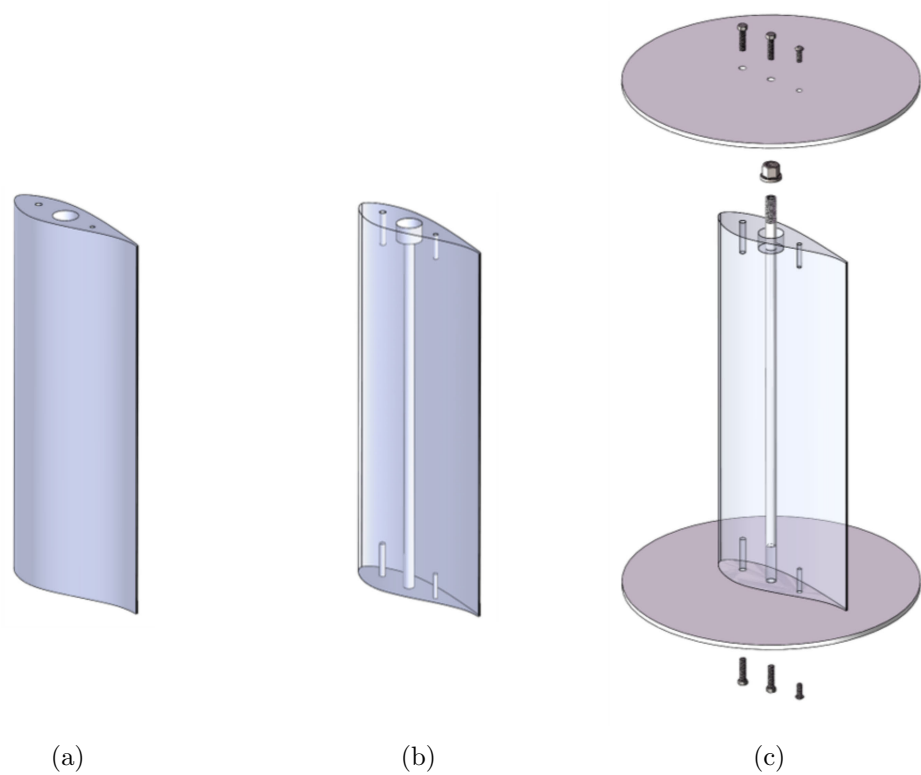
CAD drawings of wind turbine airfoil model (a) S1 (b) transparent S1 (c) S1 Assembly exploded view
